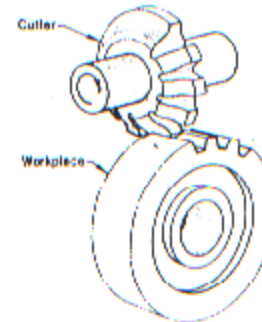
Relation of cutter and workpiece when milling teeth in a spur gear
